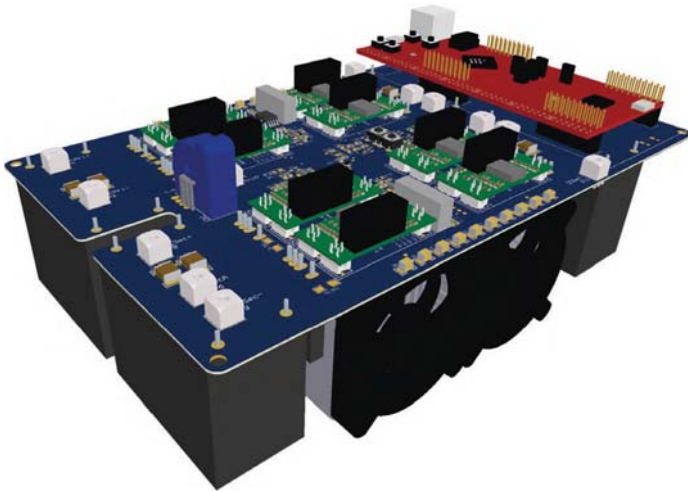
3D drawing of the designed DAB prototype. Note that the magnetics are not shown but they should be accommodated underneath the circuit
